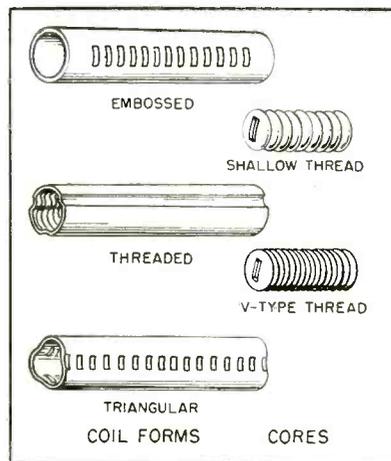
Types of internally threaded coil forms and mating threaded iron cores
